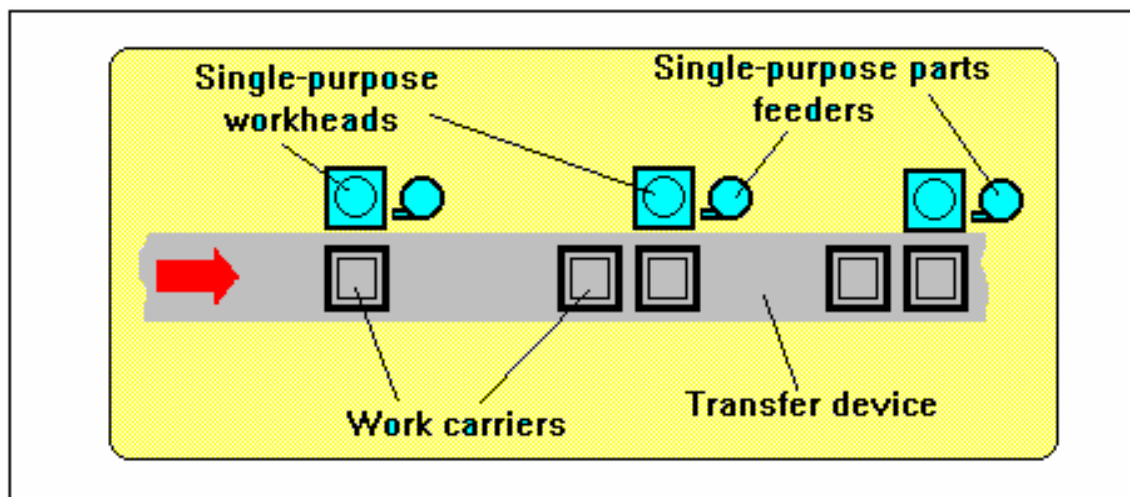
Automatic Assembly using Free Transfer Machines (AF)
